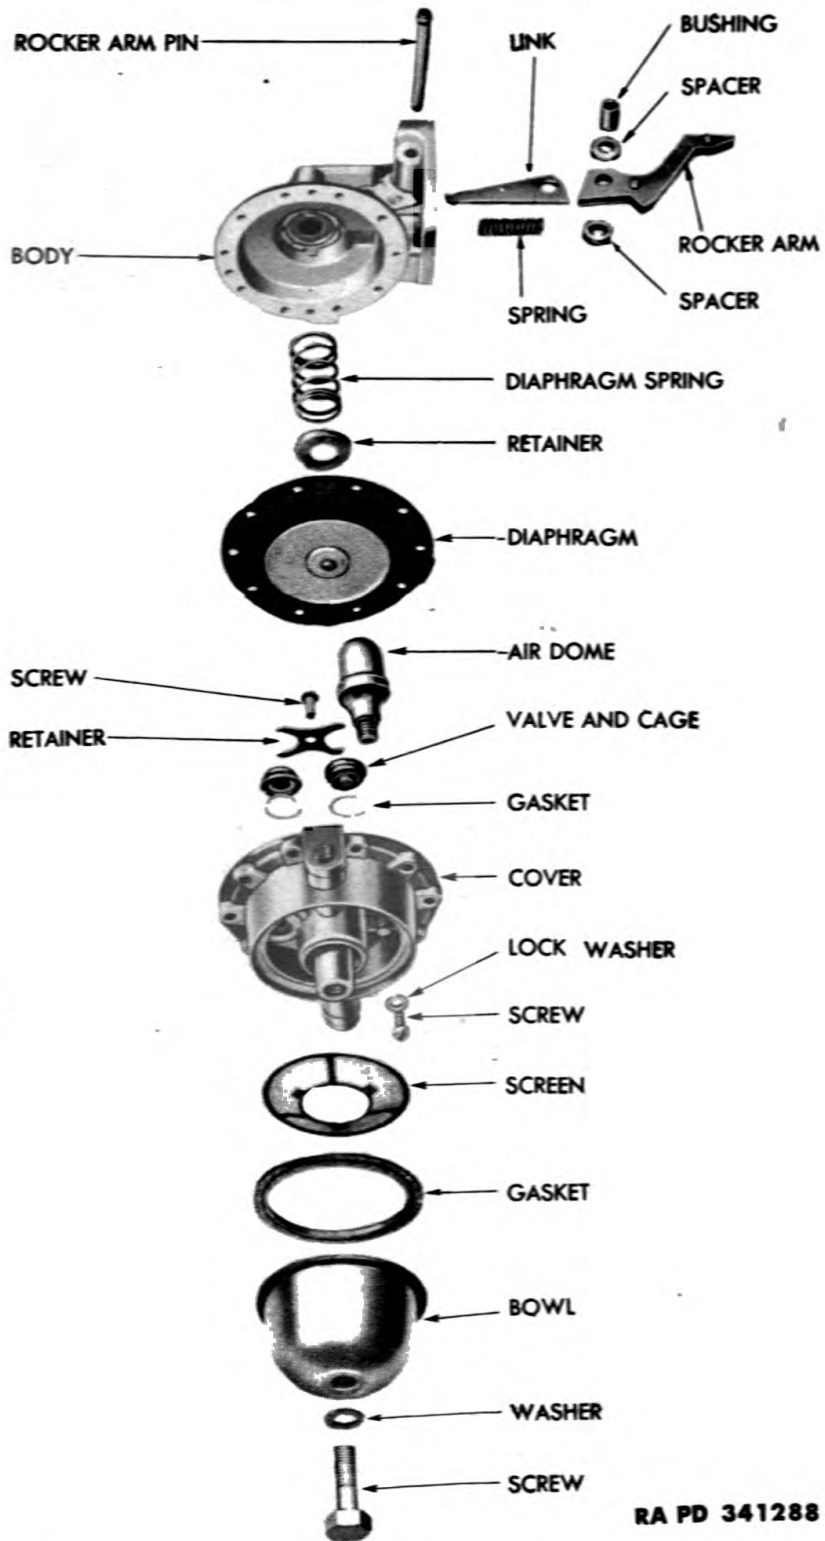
Fuel Pump—Disassembled (Typical Series AH and AW Construction)
